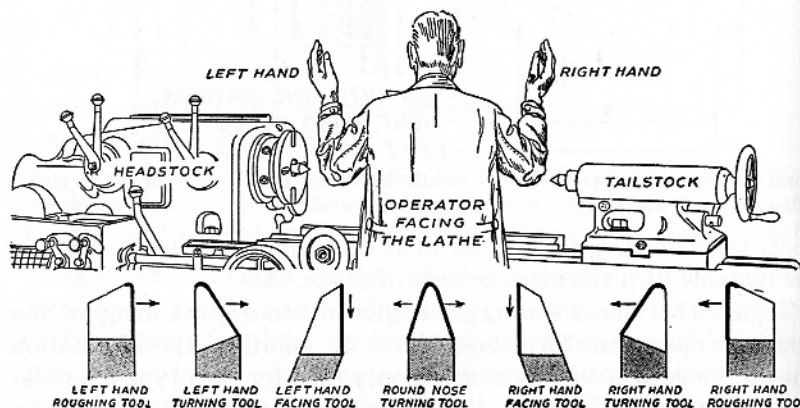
How to distinguish between right- and left-hand tools. When the tool is held face up with the nose pointing away from the operator and the cutting edge is on the right side, it is considered a left-hand tool because it is used to make a cut that begins on the operator's left, even though it moves to his right; and vice versa, if the cutting edge of the tool is on the left side, it is called a right-hand tool. (The Shell Oil Company)
